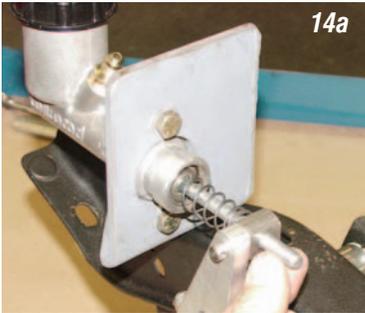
& 14b: The pushrod shaft for the master cylinder can be turned so that clutch pedal height can be adjusted. This can be done on the bench.
